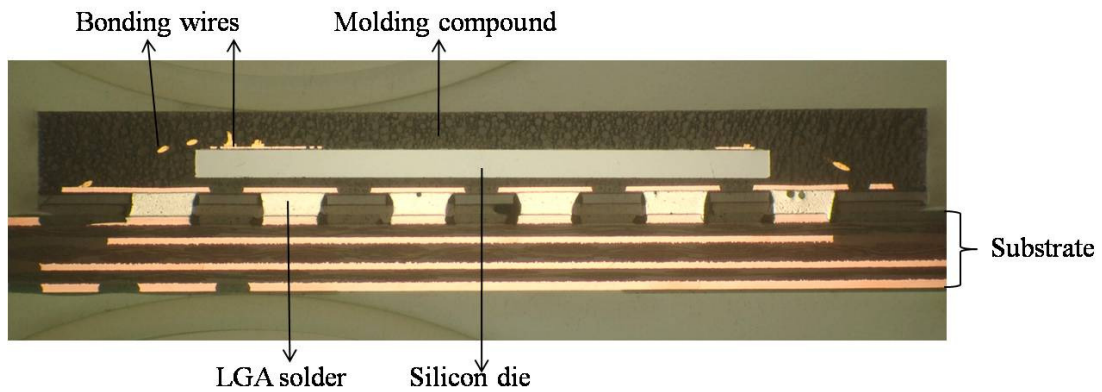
A cross section of a wire bond LGA package [Prismark, 2008]
